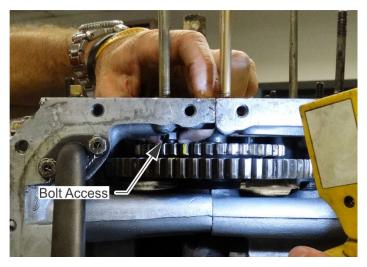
Install Camshaft Screws through the Fuel Pump Mount Opening
